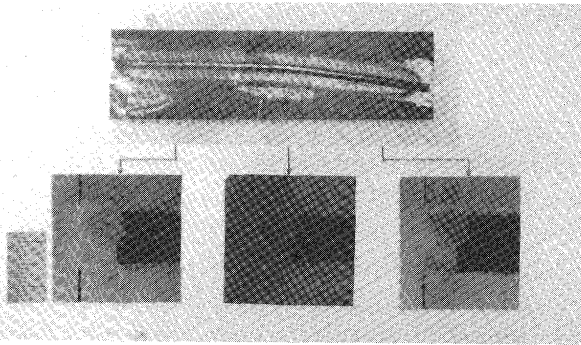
Bead appearance and cross sections of the weldment which is automatically controlled.
